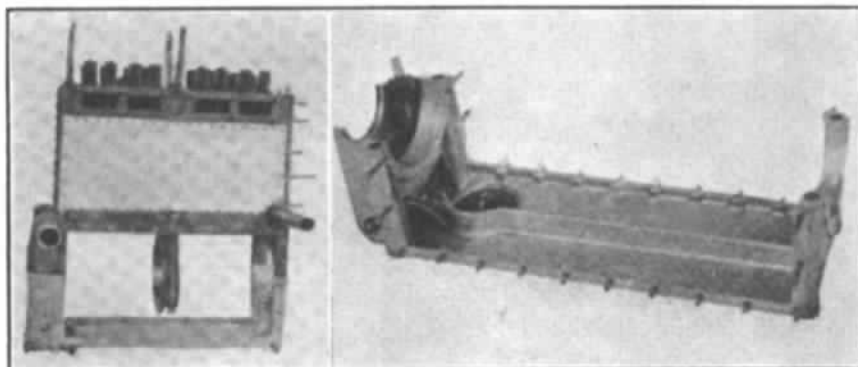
THE CYLINDER BLOCK AND THE LOWER HALF OF THE CRANKCASE WITHOUT THE SIDE-PLATES AT THE LEFT AND AT THE RIGHT THE LOWER CRANKCASE WHICH CAN BE REMOVED WITHOUT DISTURBING THE CRANKSHAFT
